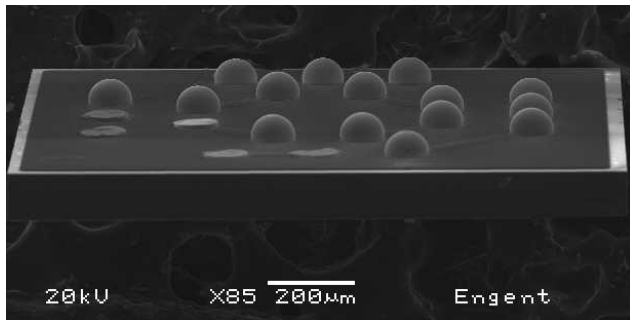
Missing Bumps on Quadrant 4 Flip Chip Die
